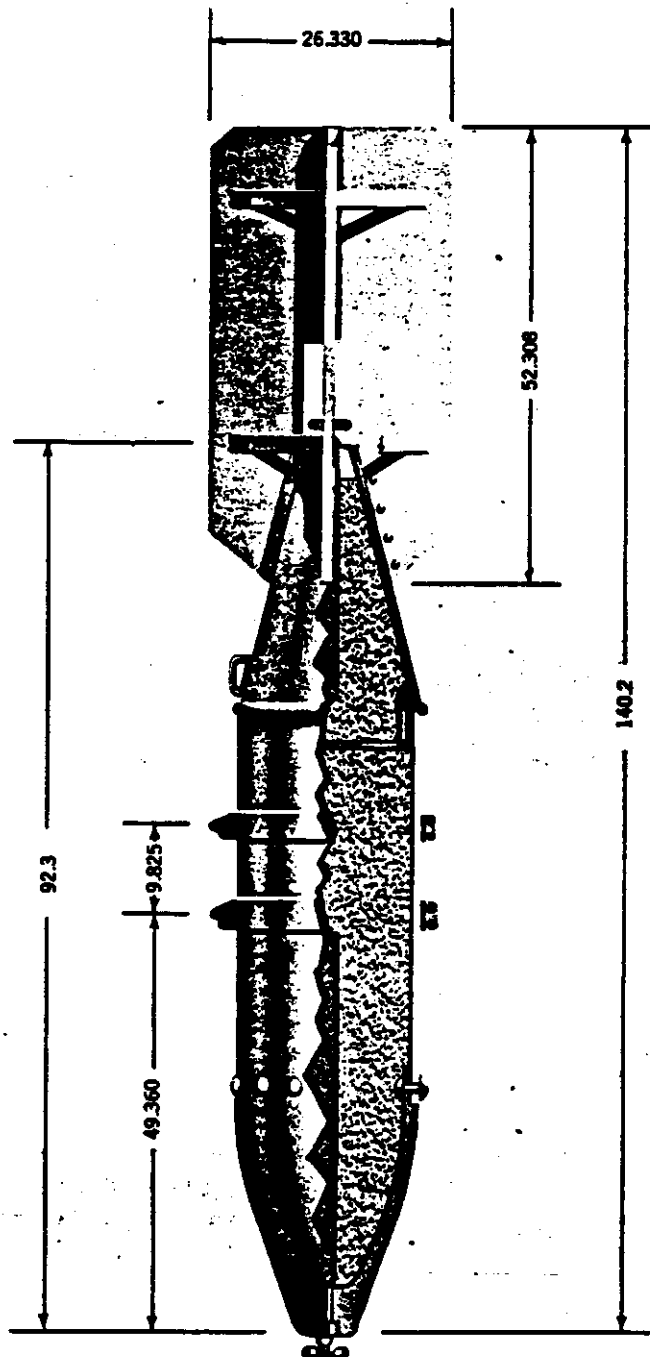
FAB-1000 (WELDED) GENERAL PURPOSE BOMB.
